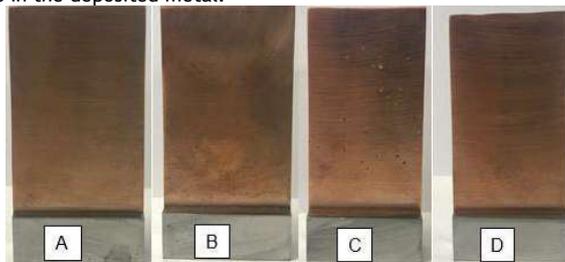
Cu WAAM machined walls. A and B - Cu welding wire with local and global shielding, respectively. C and D - Cu electrical wire with local shielding and global shielding, respectively.
